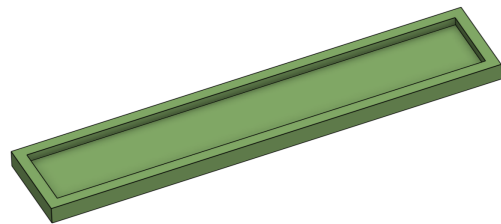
CAD model of the soft pneumatic wheel bottom mold
